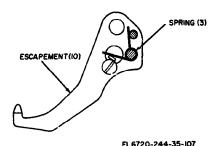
Spring location (spring (3) from fig. 3-12).
